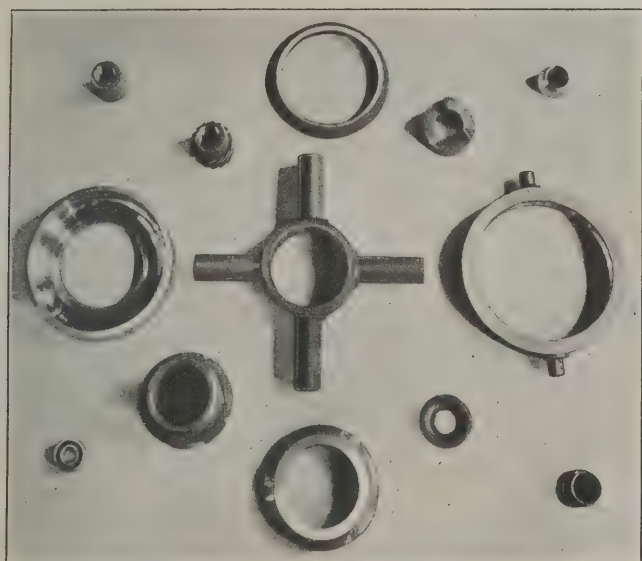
Some of the Automobile Parts ground on Rivett Grinding Machine at the Stevens-Duryea Co.'s Factory
